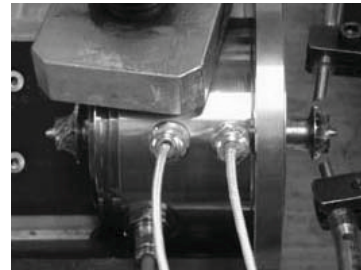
Compressor-turbine unit without the compressor and turbine stator parts during the balancing (compressor on the left and turbine on the right.)
